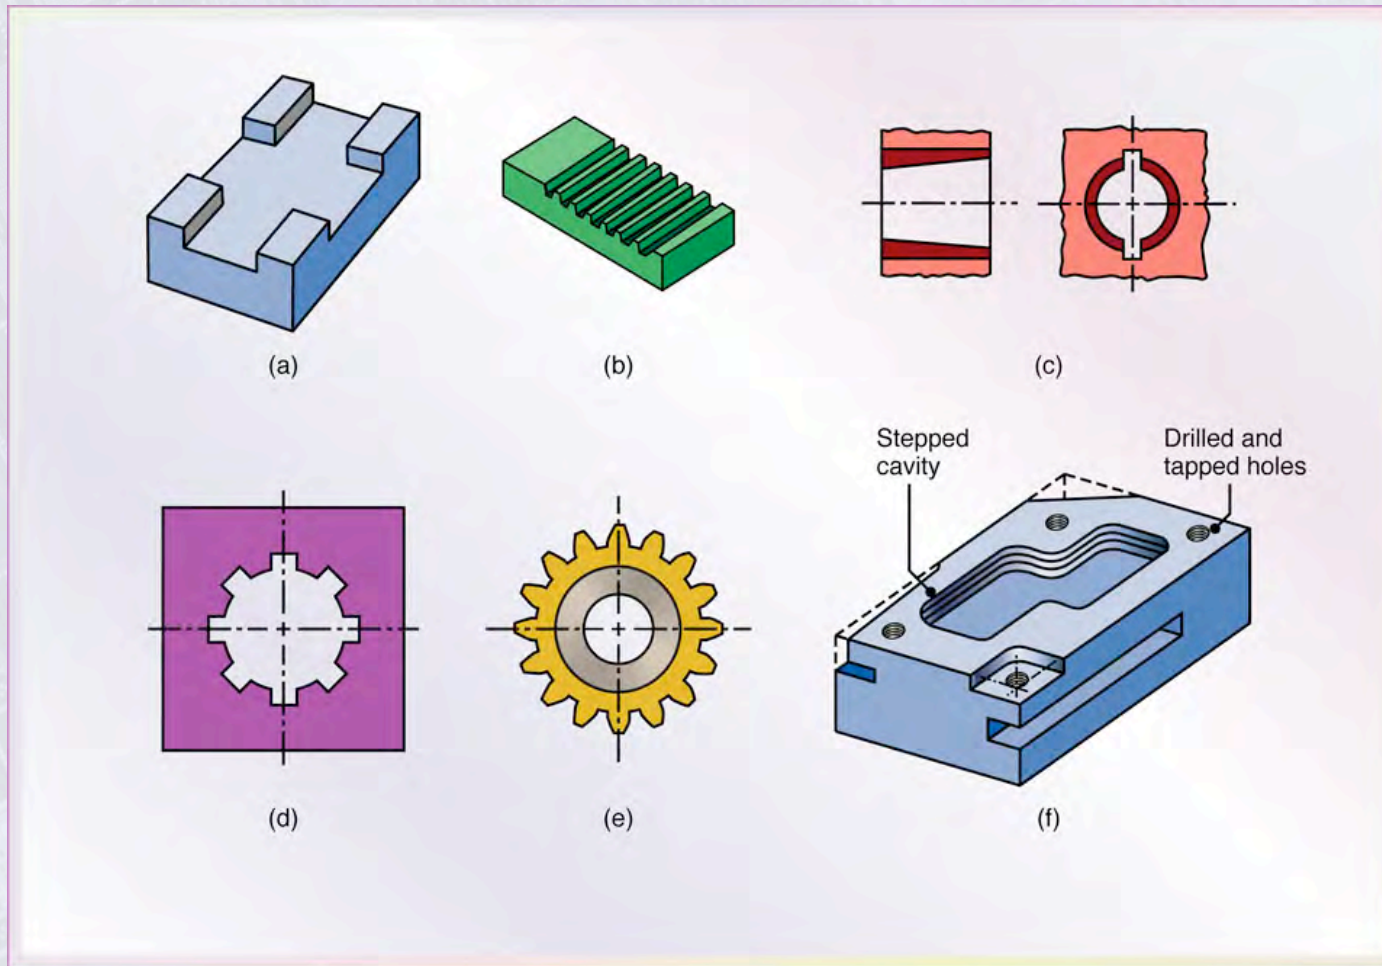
Typical parts and shapes that can be produced with the machining processes described in this chapter.
